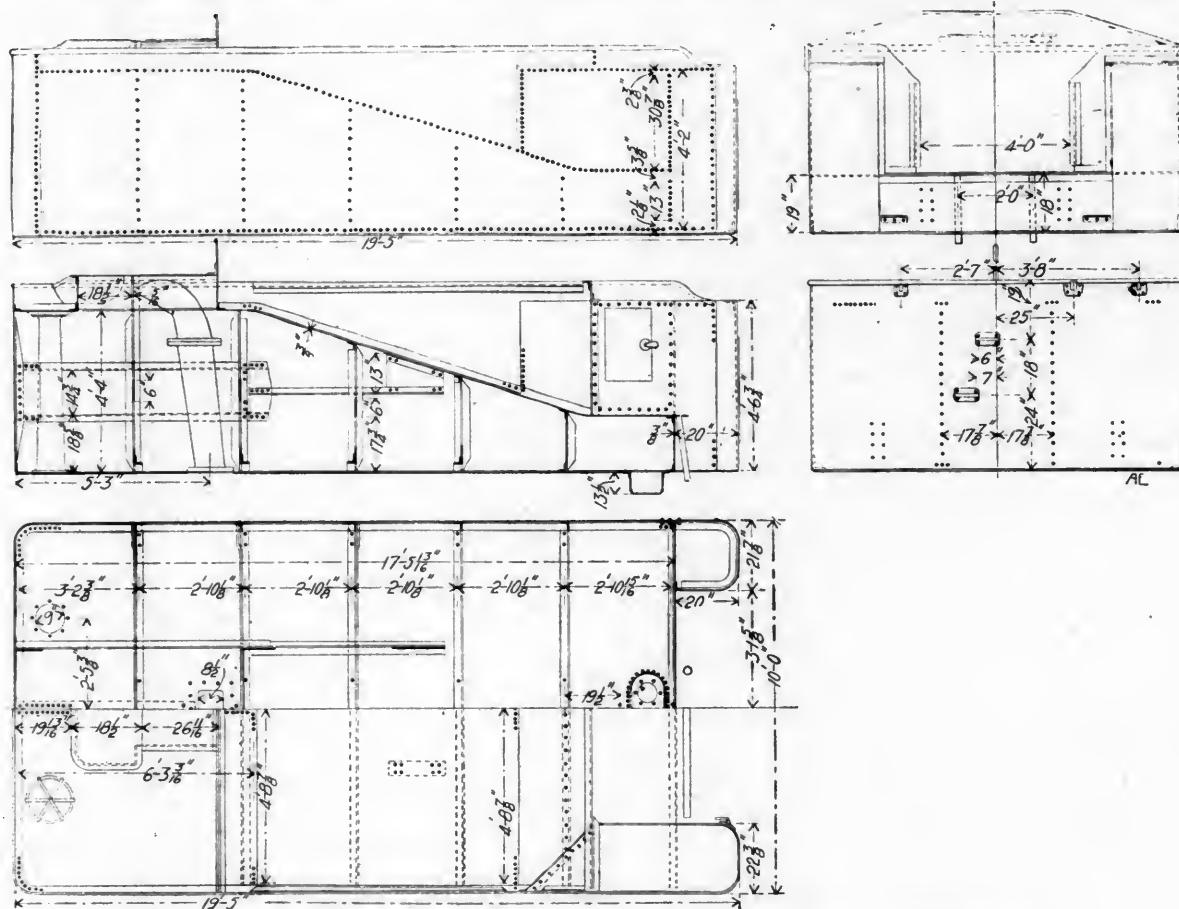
Sectional Views of Tender Tank for Class E1 Engines, Pennsylvania Railroad.
